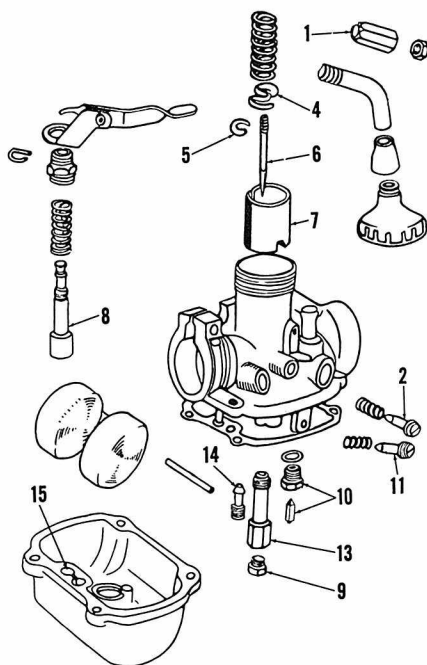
Exploded view of typical carburetor used on HM/S, 7D and 7S models.
